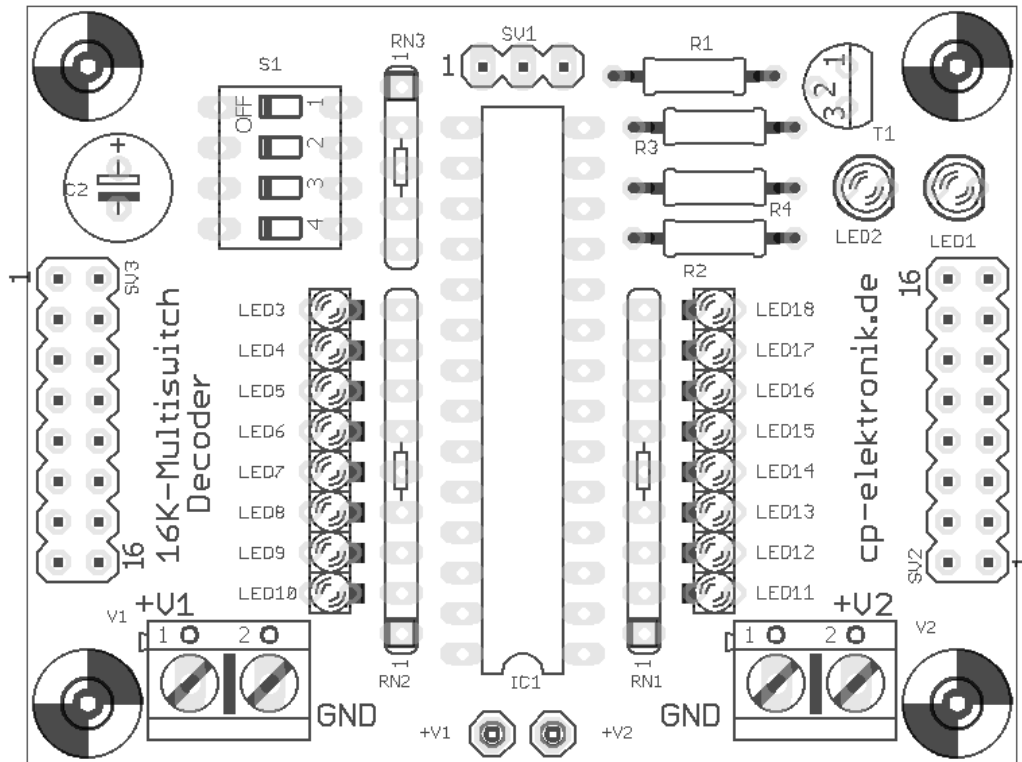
Position of the wired components on the assembly side of the printed circuit board
